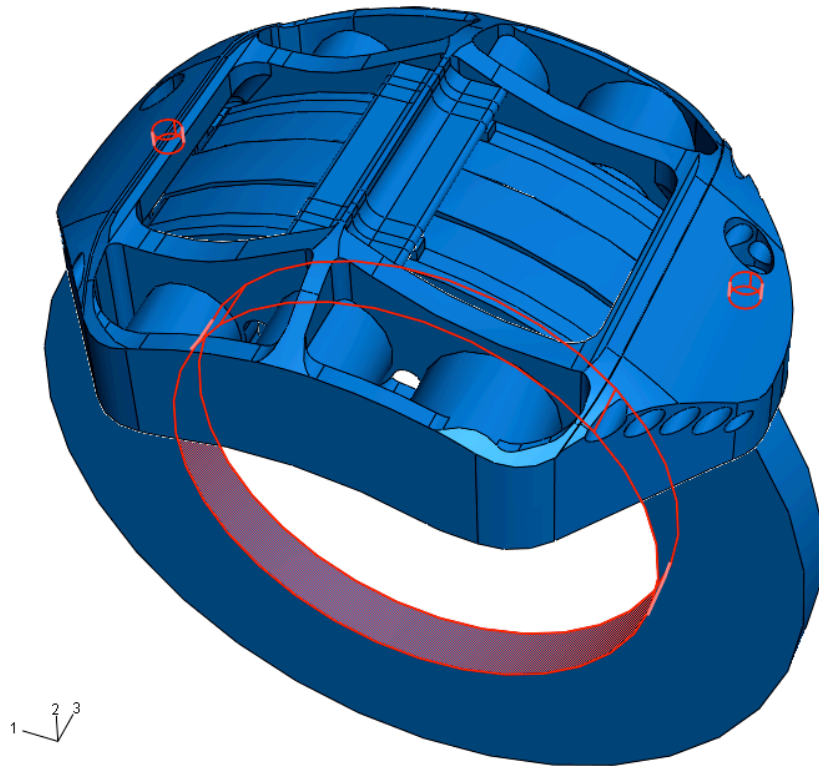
Six pot brake assembly, caliper and disc boundary conditions
